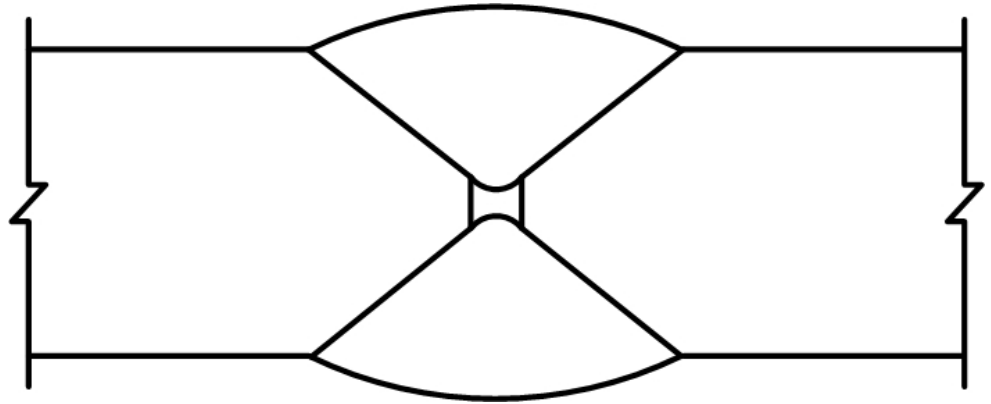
Incomplete Penetration of a Double V-Groove Weld
